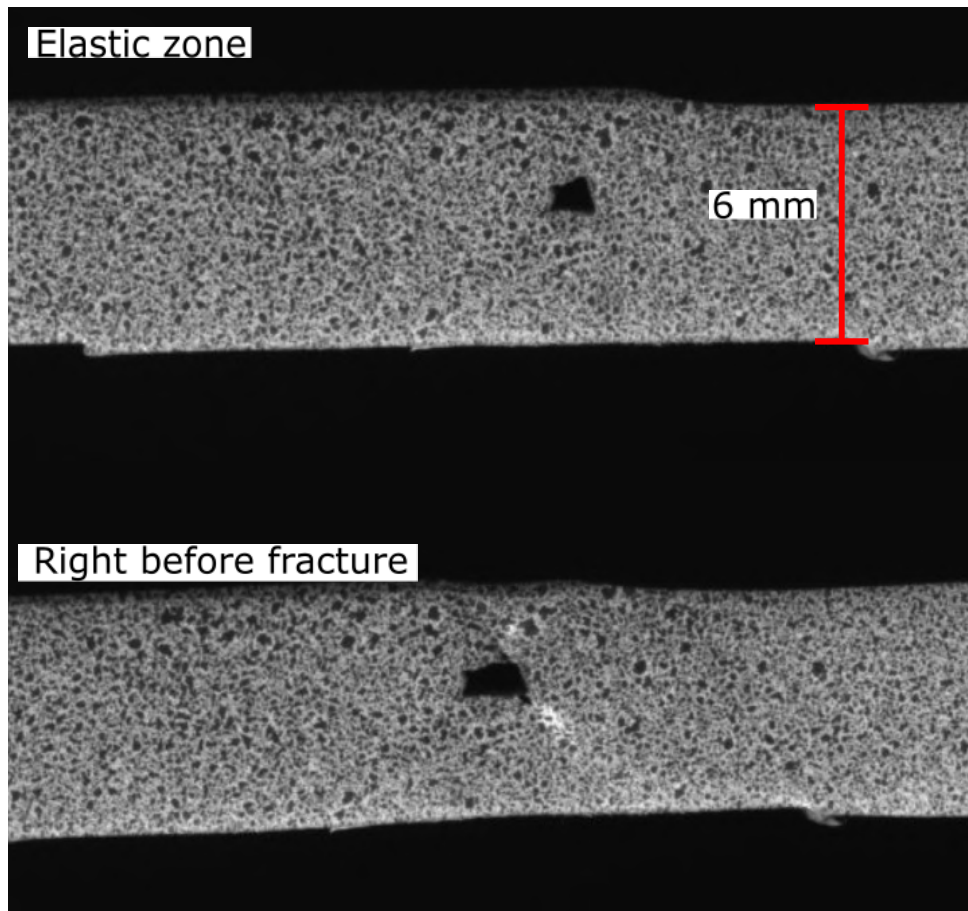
Pictures of the AA6061 similar 1000 RPM, 4 kN and 120 mm/min tensile sample. A wormhole defect is observed before and after the tensile test.
